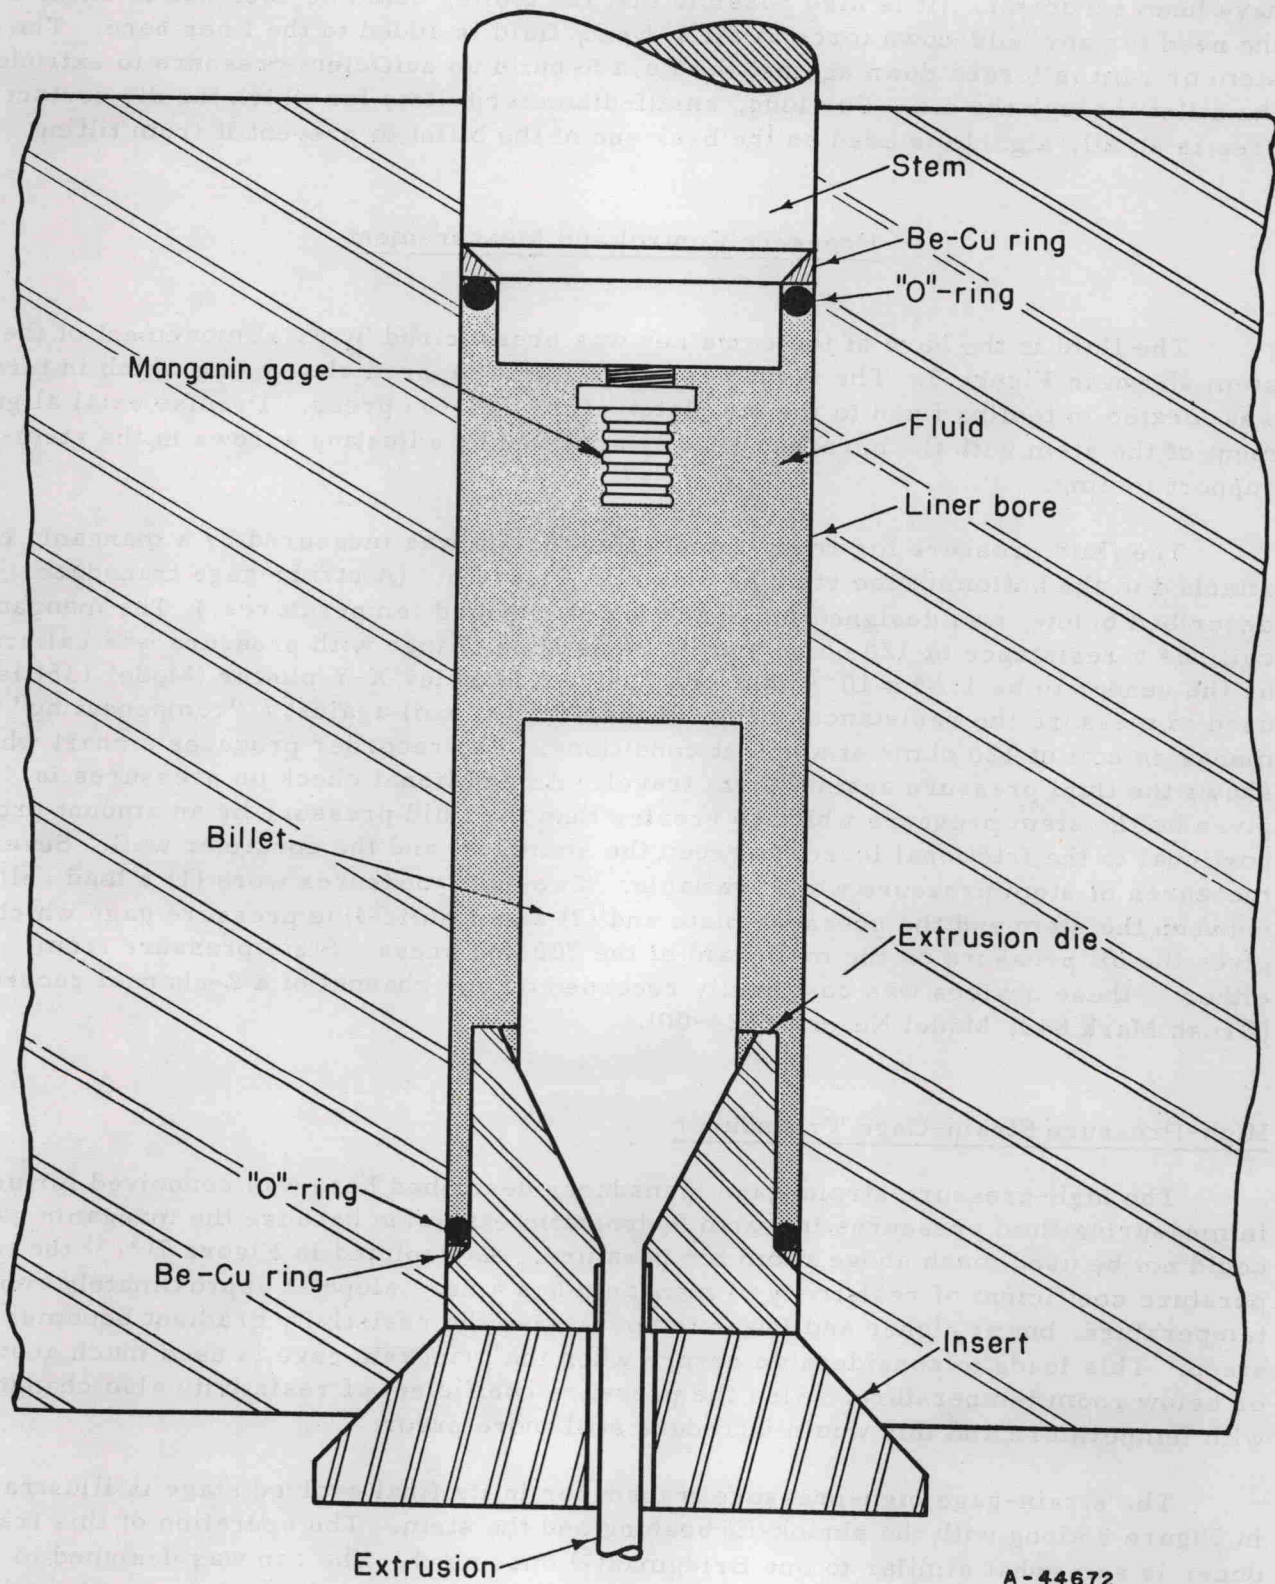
DETAILS OF HYDROSTATIC EXTRUSION PROCESS SHOWING THE STEM AND DIE SEAL METHODS, AND PARTIALLY EXTRUDED BILLET
